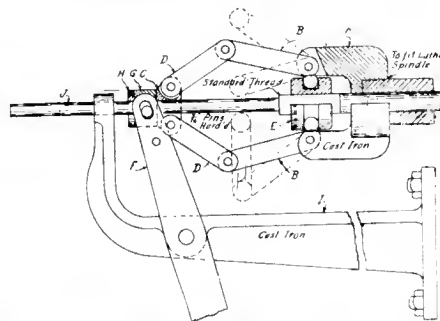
TOGGLE JOINT FOR LATHE CHUCKS.
